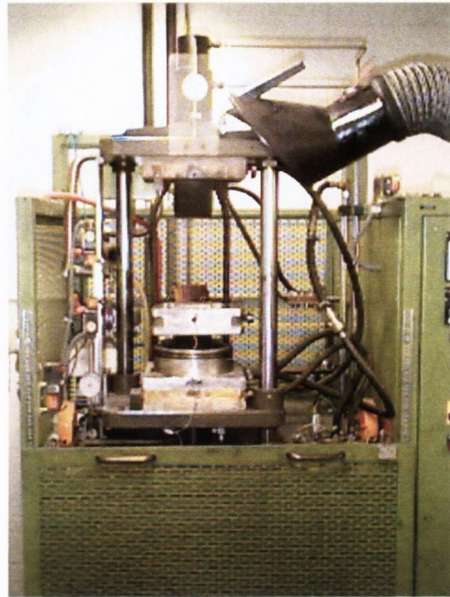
Hot Press front view showing the mould assembly sitting on bottom graphite electrode. The water cooling pipes (black) can be seen with the electrical control panel on the right hand-side.
